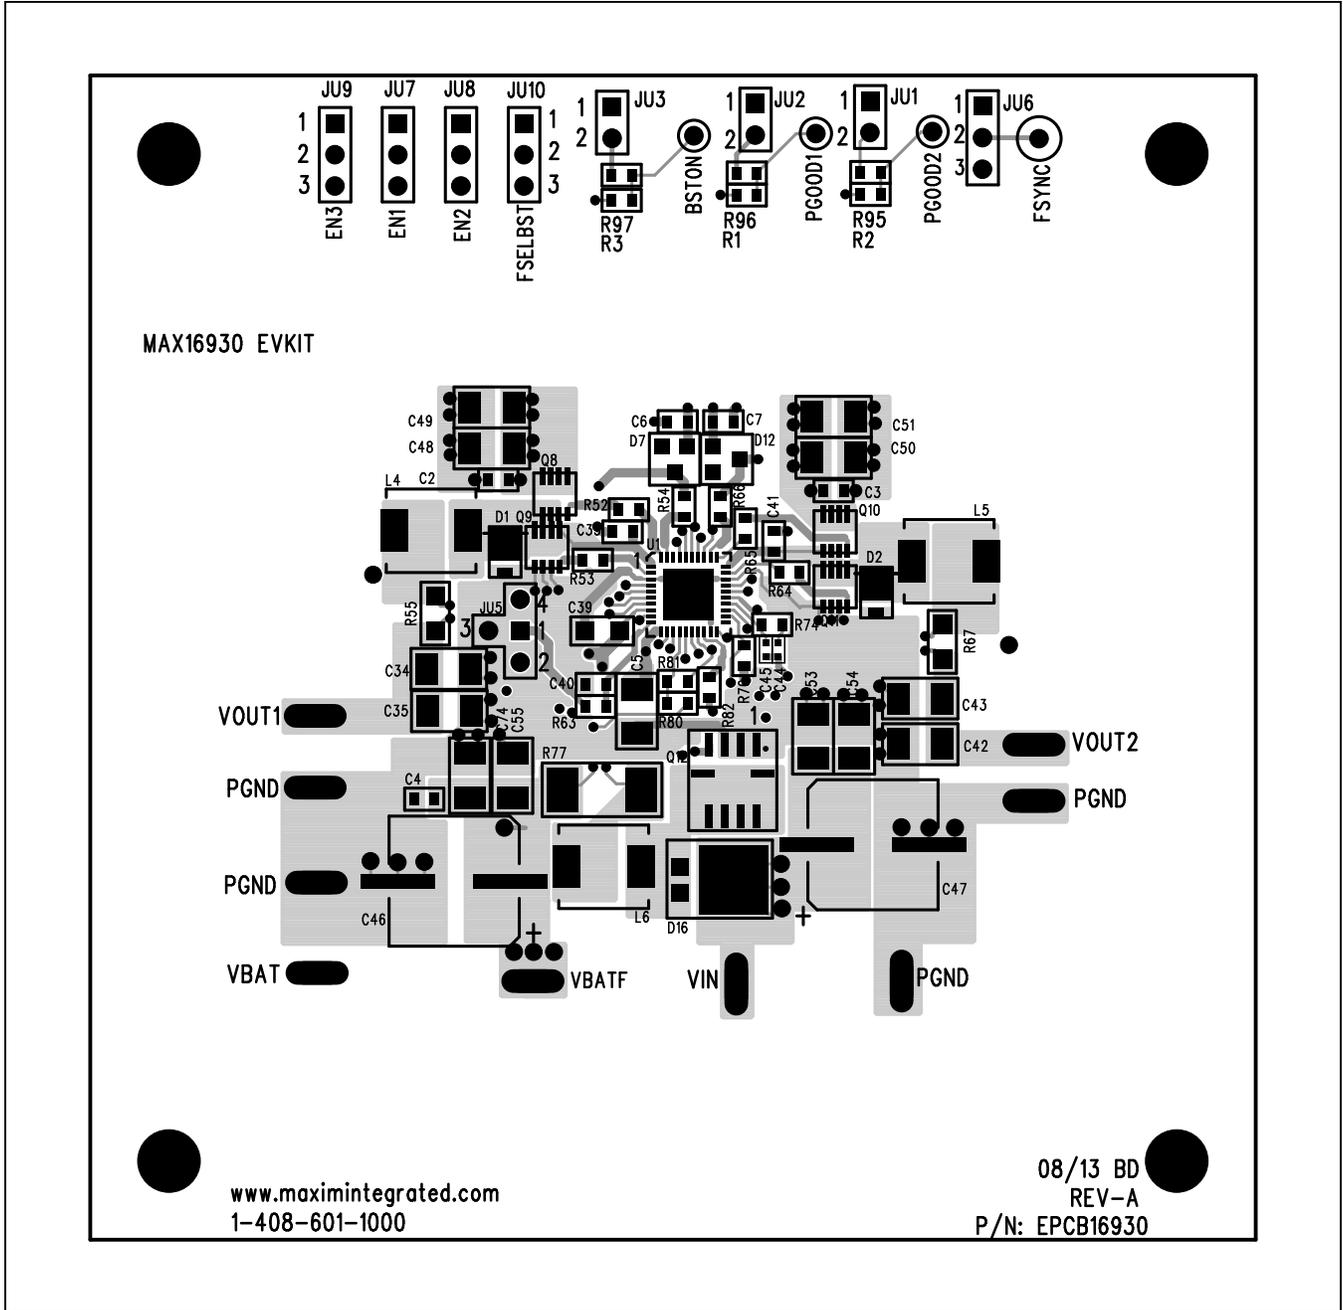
MAX16930 EV Kit PCB Layout—Component Side
